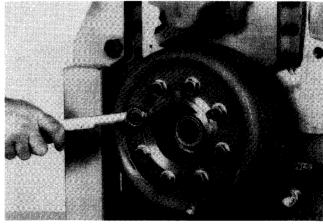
Remove brake drum stud nuts (used only to hold drum in place after drive shaft was removed).
